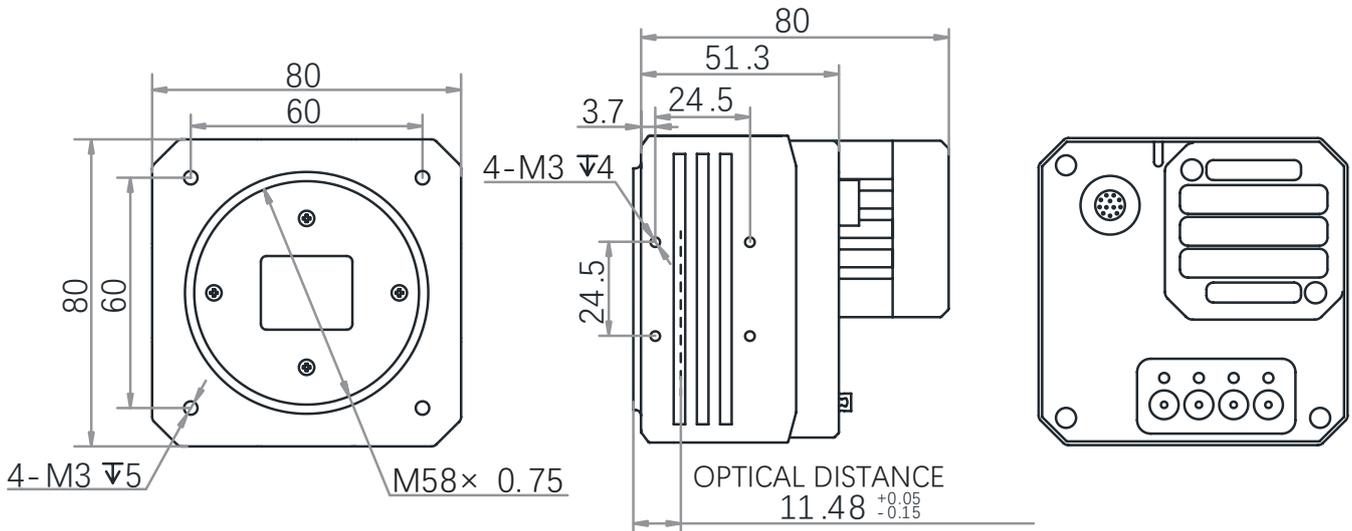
80 * 80 * 80 mm mechanical dimensions of the CoaXPress camera with M58, which adopts M3 specification screws.
